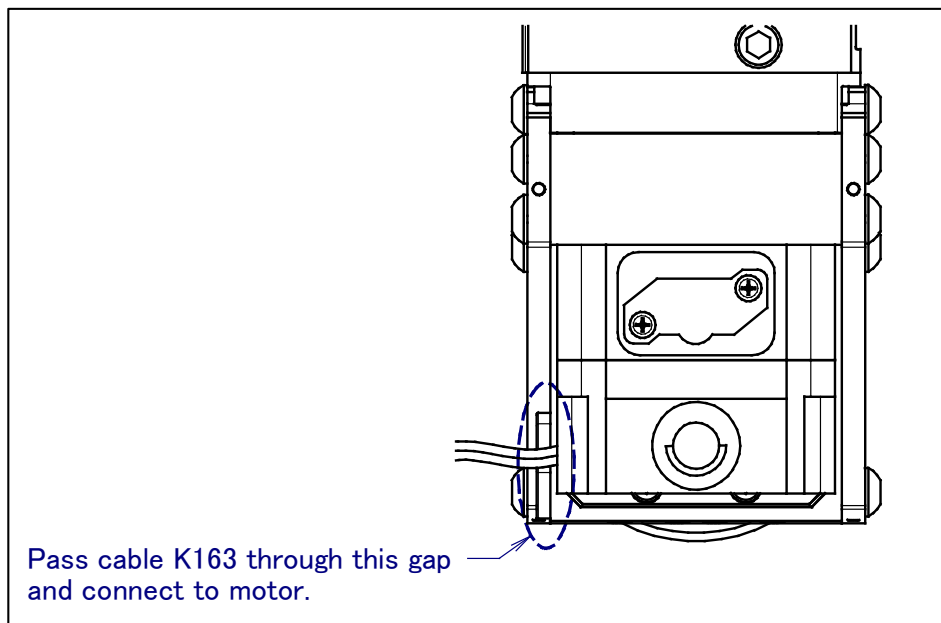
(h) Forming cables to bracket (5/5)
